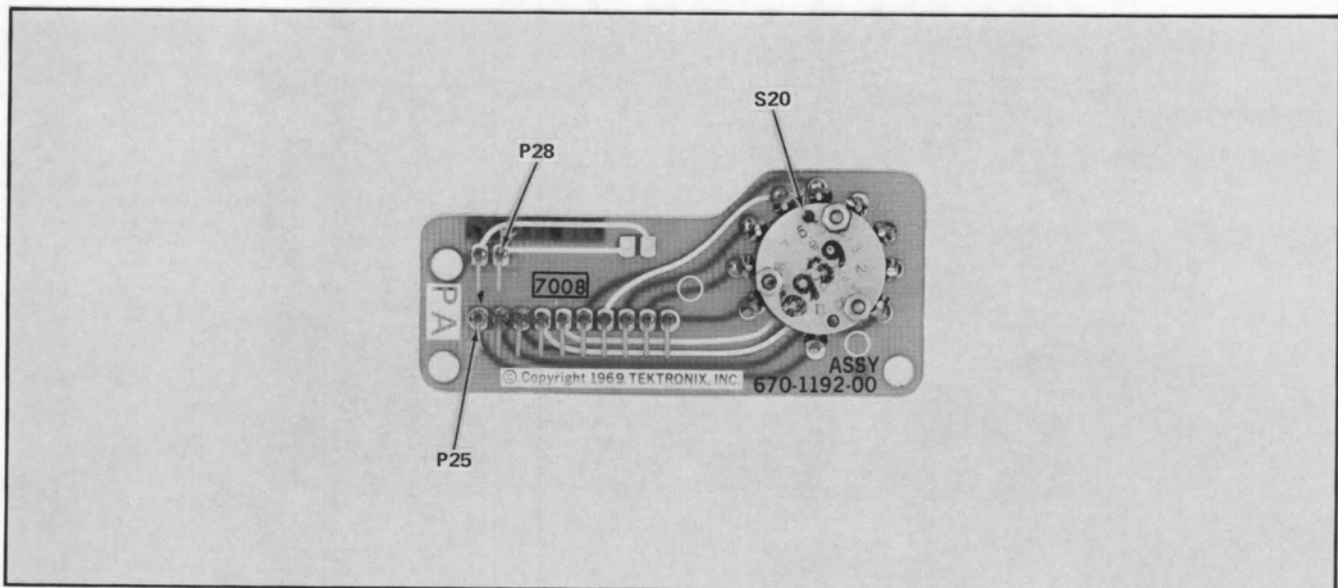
Shutter Speed Switch circuit board; component identification.
